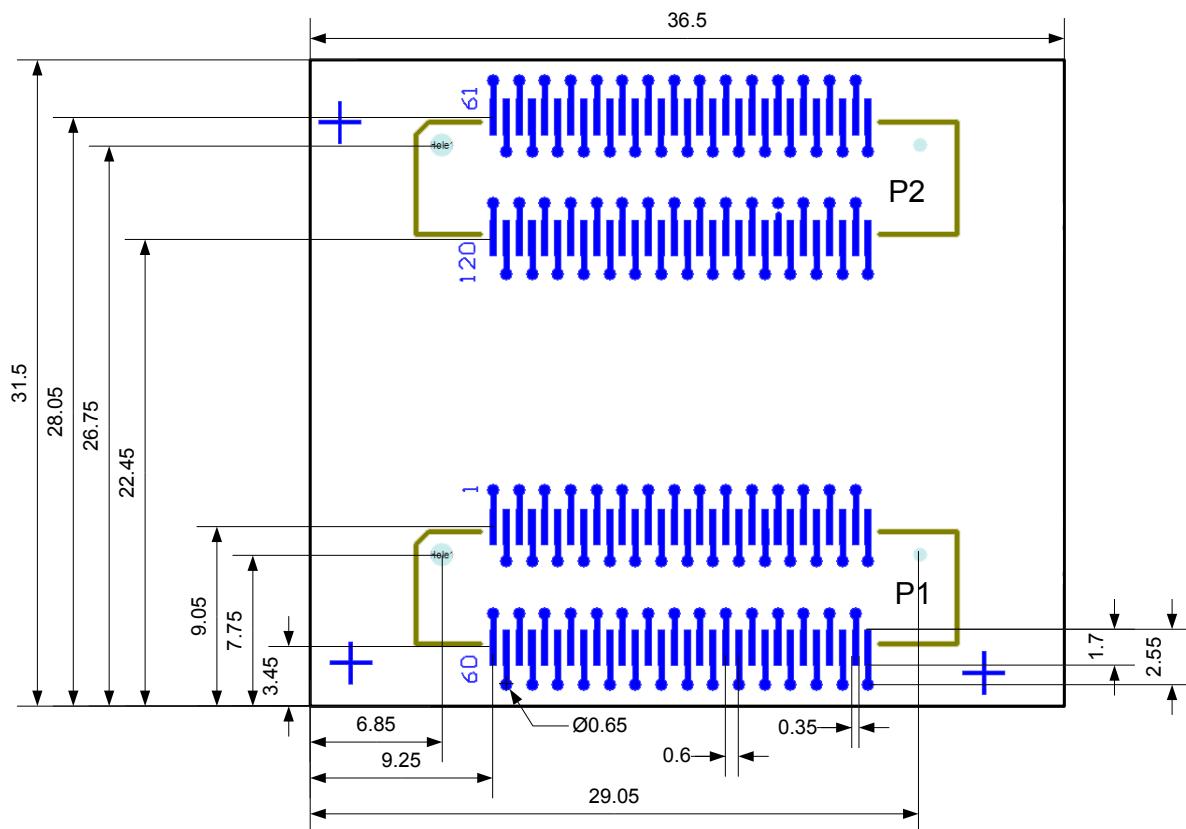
Mechanical outline and Bottom Connectors (top view)
